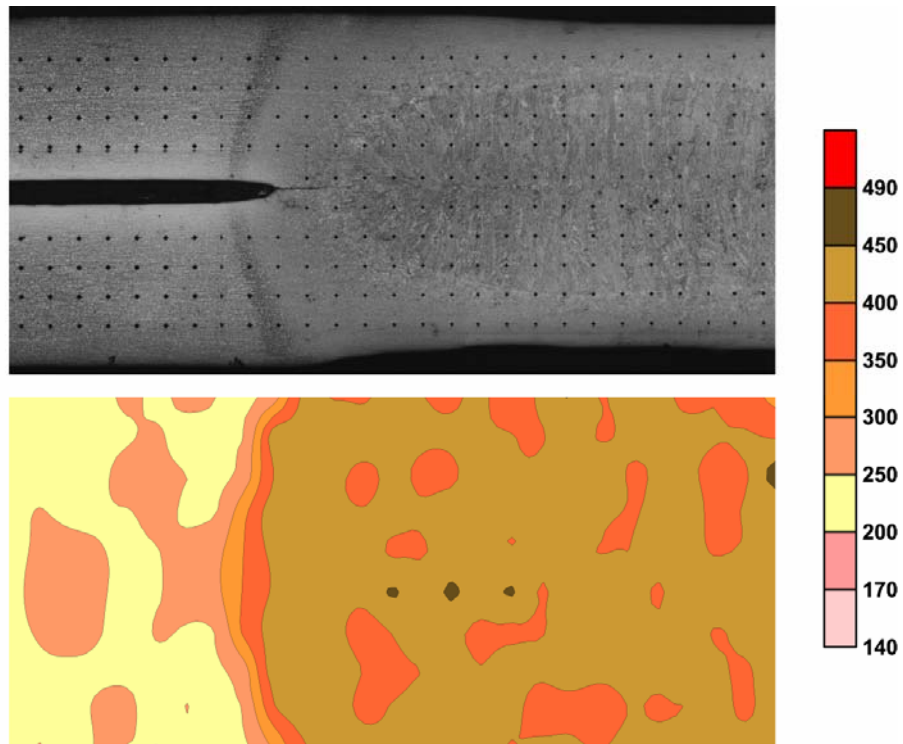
Hardness Mapping for DP780 RSW weld
